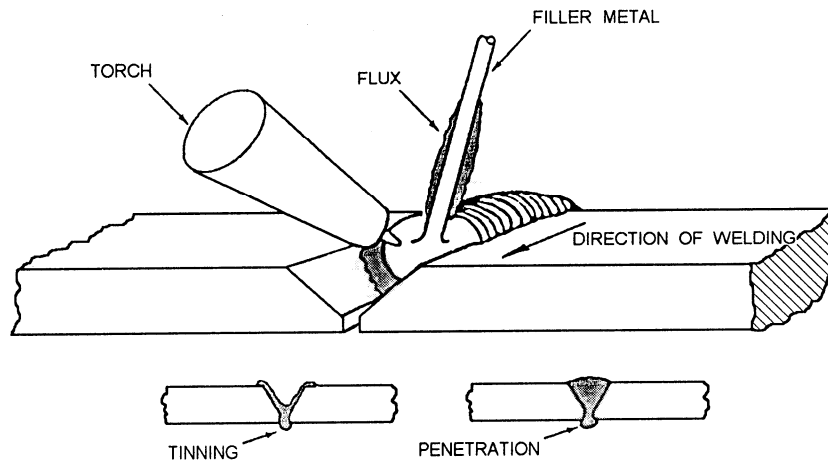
Braze welding cast iron, using the backhand method.
